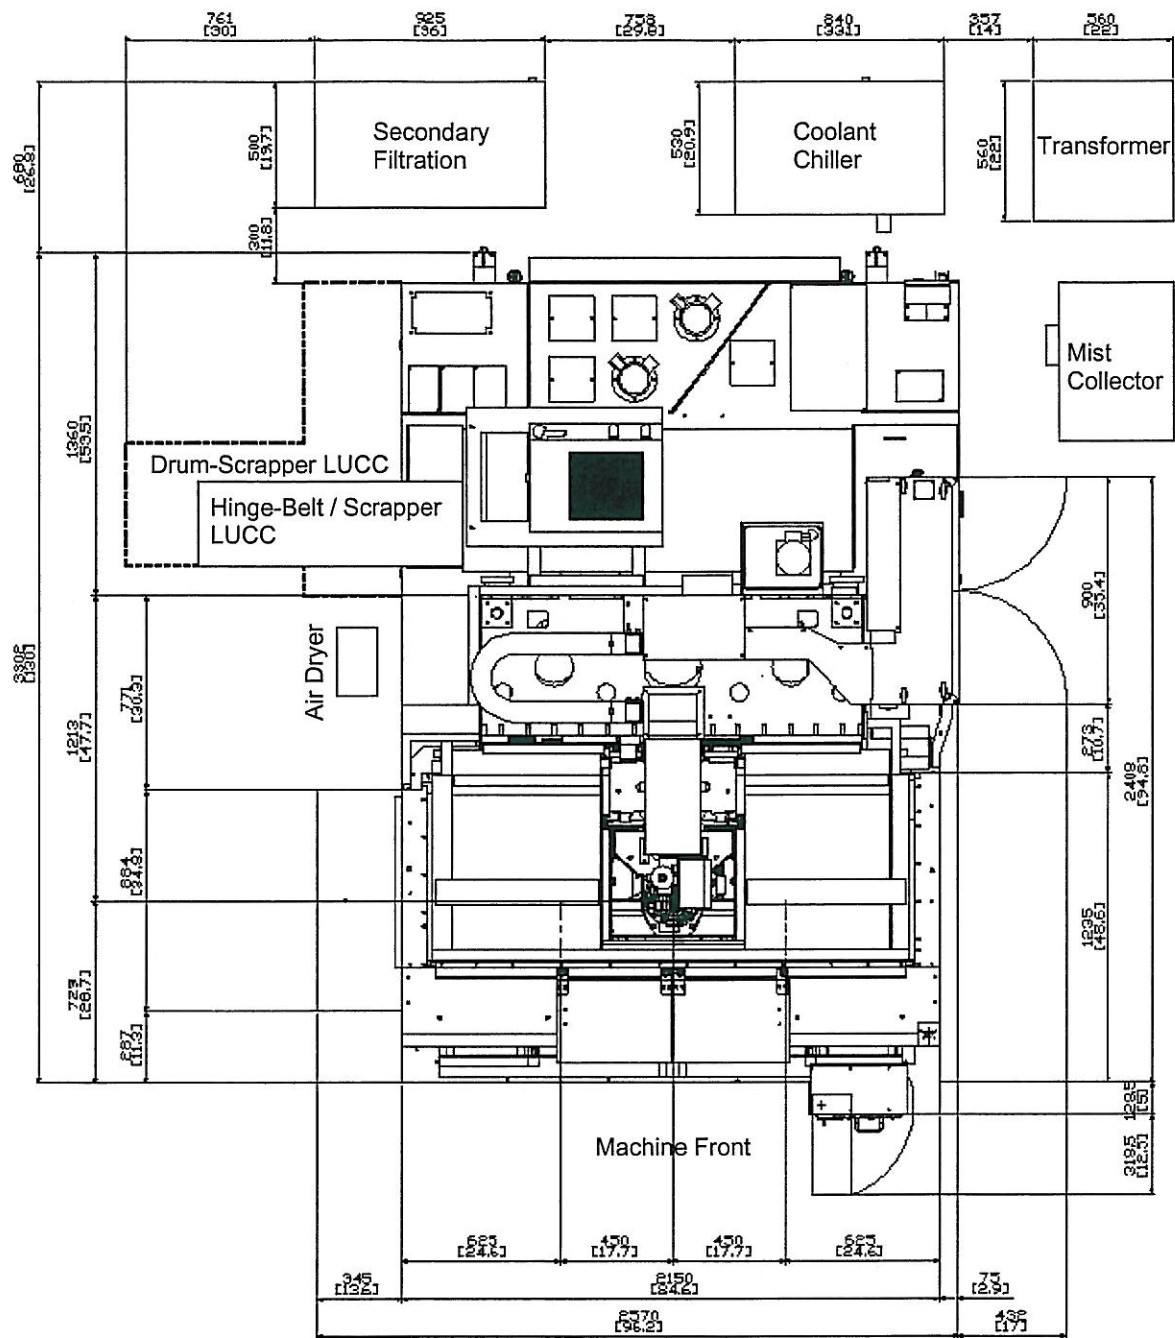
S56 Floor Layout (Left Lucc with Options)
